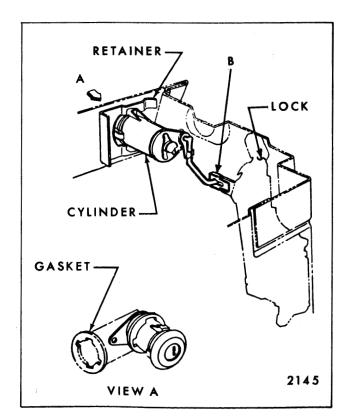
Front Door Lock Cylinder Removal – Chevrolet "B" Four-Door Styles
